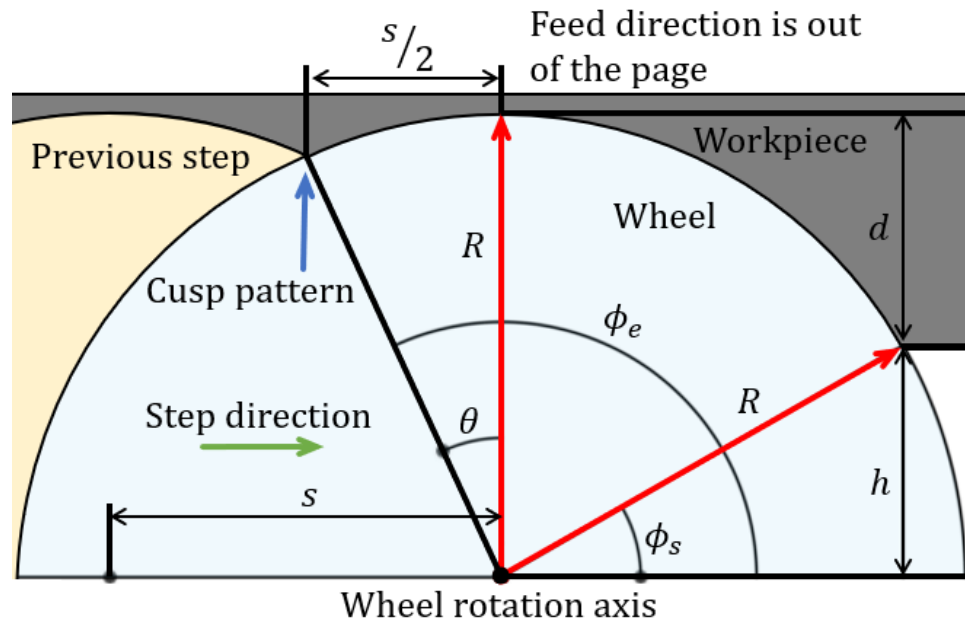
A schematic of the wheel-workpiece interaction in cross axis grinding
